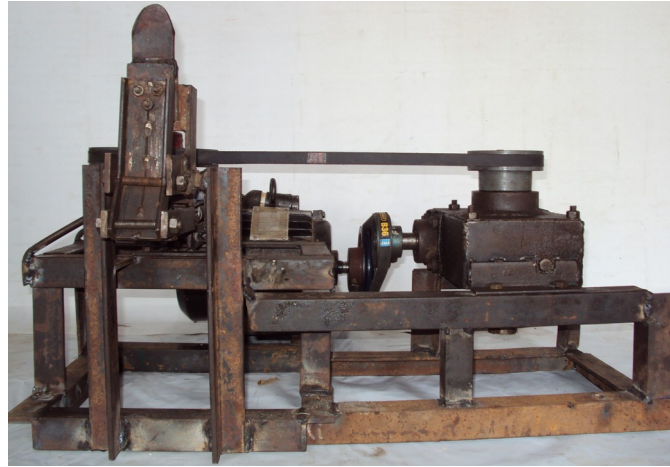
a. Powered-coconut husking machine (*Front view*)
